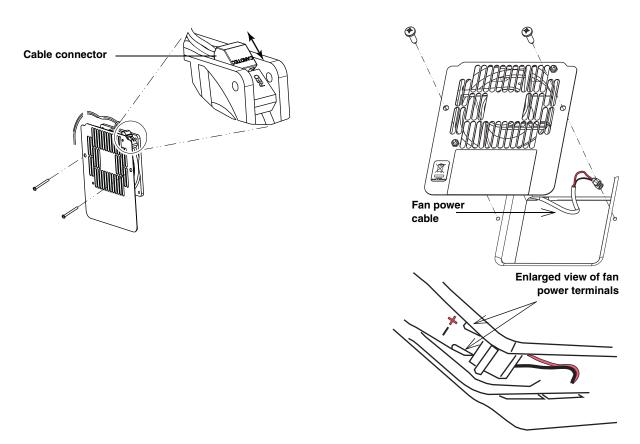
Remove fan mounting screws and disconnect cable (view from inside refrigerator)
